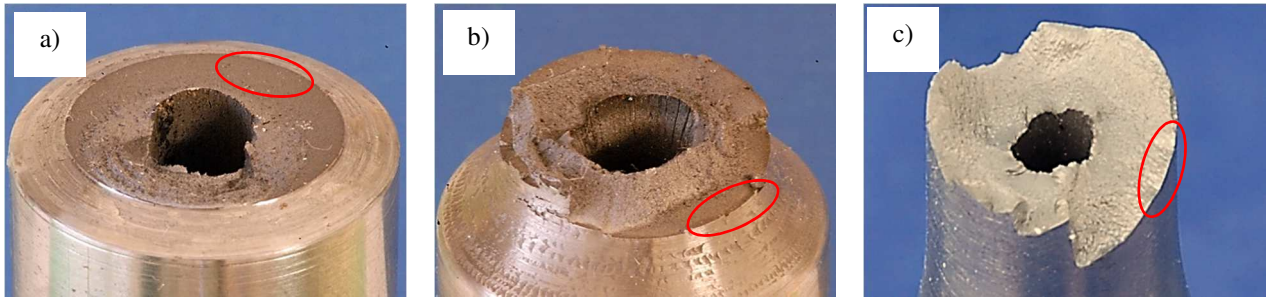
Fracture surfaces. Circled in red the crack nucleation site. a) V-notched specimen; b) semi-circular notch specimen; c) smooth specimen
